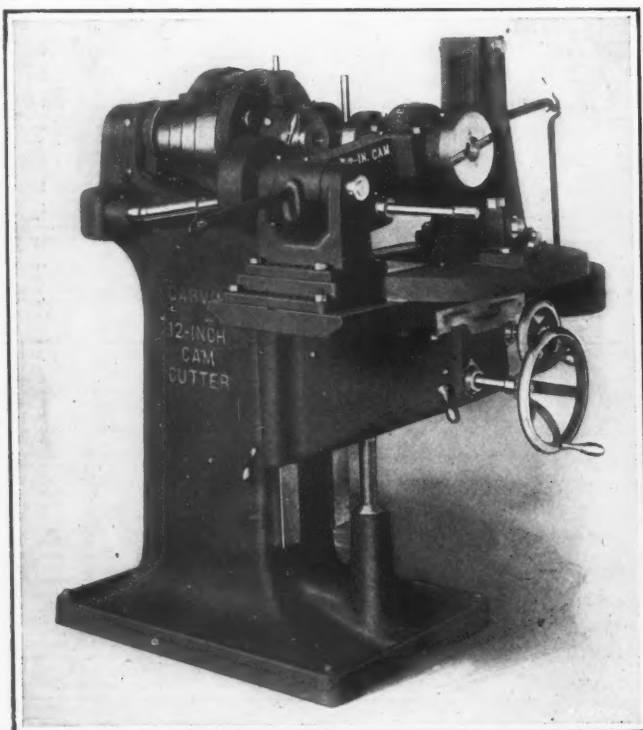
Garvin Cam Milling Machine equipped for Flat Cam Work
